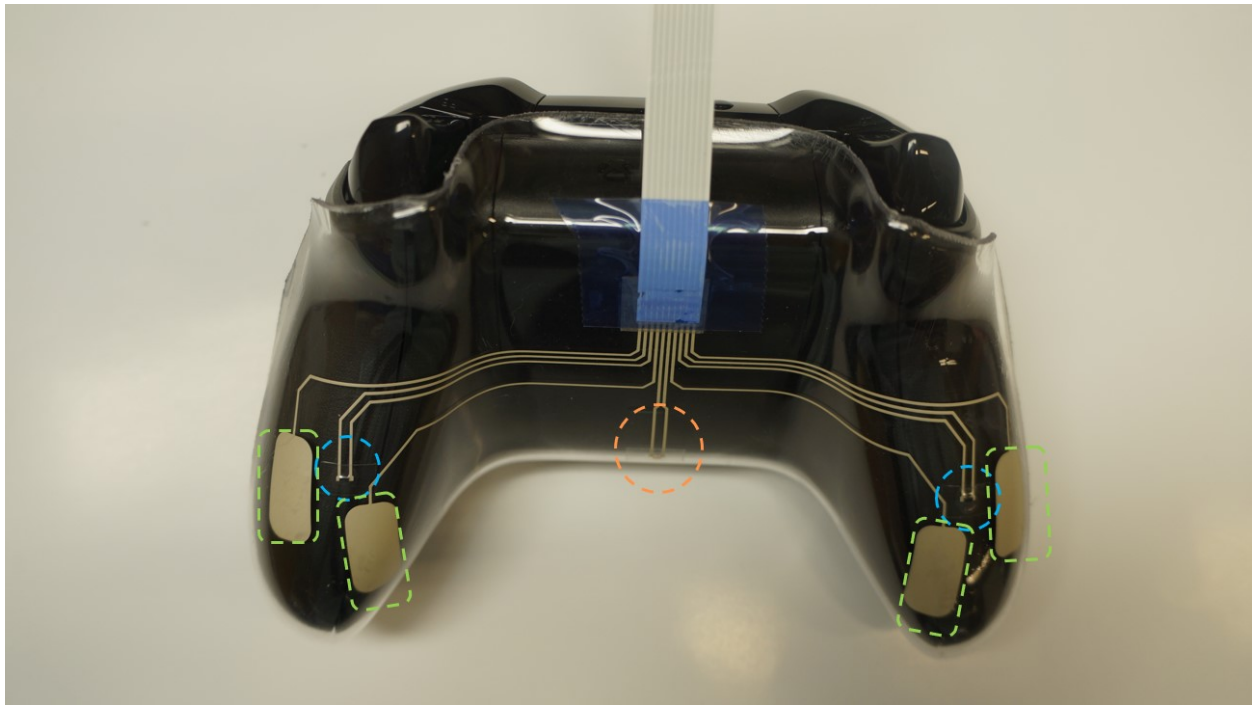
Xbox controller in-mold electronics demo. Green: Printed silver capacitive touchpads. Blue: Surface mounted thermistors. Orange: Surface mounted LED.
